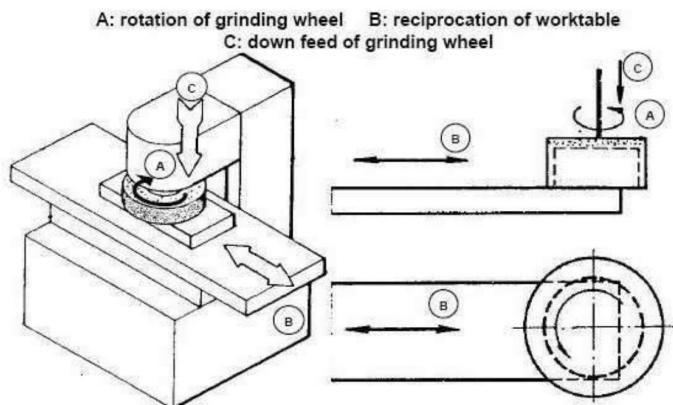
Vertical spindle and reciprocating table grinding machine
